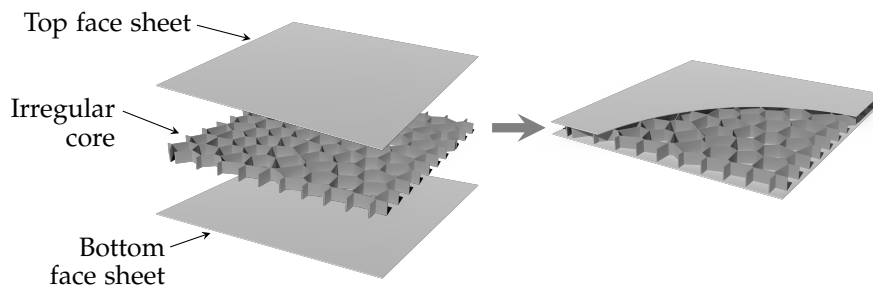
Sandwich panel composed of a top face sheet, an irregular core structure, and a bottom face sheet.
